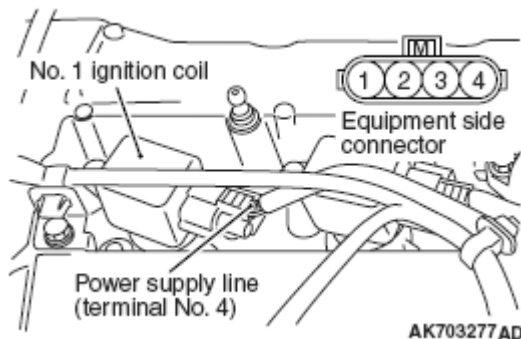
No. 1 Ignition Coil & Equipment Side Connector
